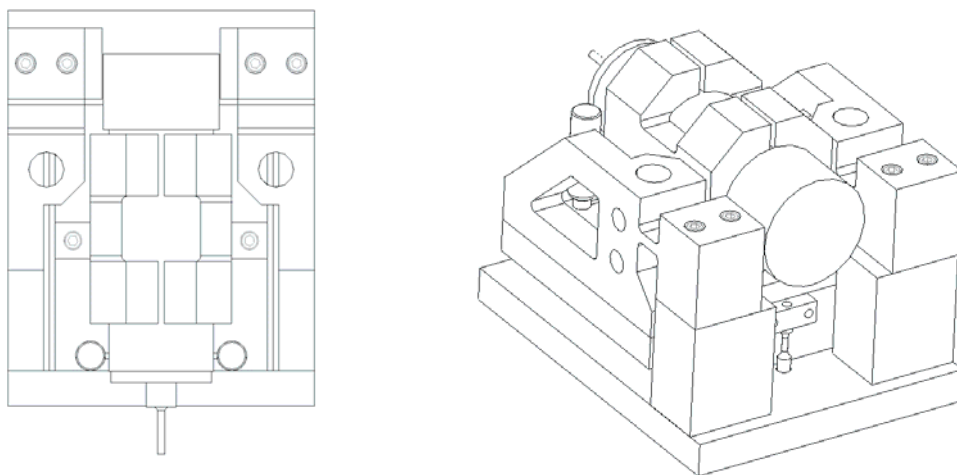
Two-Axis Force Measurement Spindle Actuator Design
